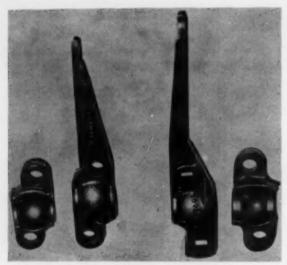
Knife heads used on reciprocating cutting mechanisms for grass and grain cutting machines. Left, heat treated forgings. Right, redesigned part made in ductile iron, heat treated for good wear resistance.
